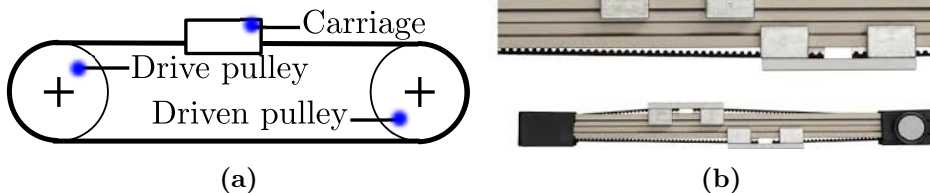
(a) scheme of a belt drive and (b) picture of the belt drive ZLW-0630-OD by Igus [33].
